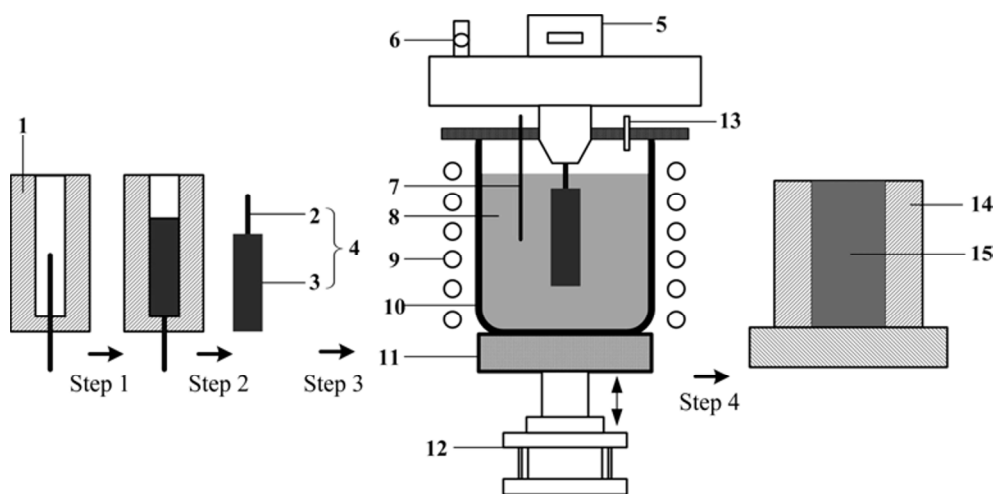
Schematic sketch of experimental setup used in this study: 1—Mold; 2—Tungsten rod; 3—Solid alloy block; 4—Vibrating horn; 5—Mechanical vibrator; 6—Accelerometer; 7—Thermocouple; 8—Molten alloy; 9—Heating coil; 10—Crucible; 11—Thermal insulation; 12—Pneumatic cylinder; 13—Gas inlet; 14—Steel mold; 15—Cast sample
